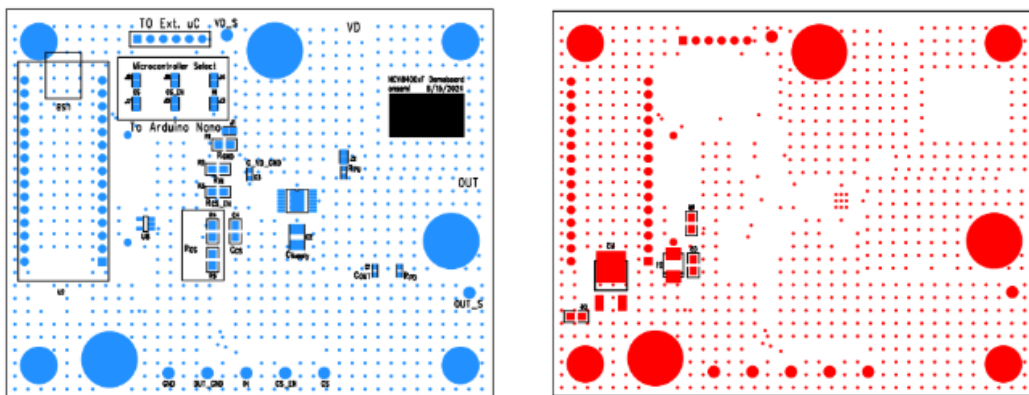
Board Layout without Traces (on Left) Top Layer, (on Right) Bottom Layer
